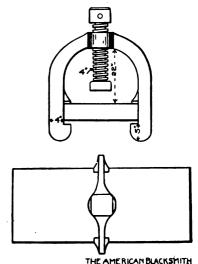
FACE PLATE AND MOVABLE PRESS.
